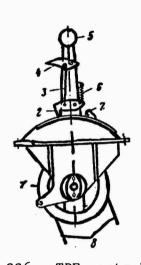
TPE control lever: 1 - pulley; 2 - latch; 3 - rod; 4 - latch finger; 5 - control lever handle; 6 - spring; 7 stop; 8 - cables. lever is retarded, the latch stops the movement at the "Flight Idle" power setting stop. The purpose of this stop is to indicate to the pilot that negative thrust will develop if the engine power is reduced further in flight. To move the power lever to the "Ground Idle" position, the pilot must withdraw the latch by applying a force to the finger 4. Similar stops are provided on the TJE power levers to prevent accidental movement of the power lever into the "Cutoff" position.
